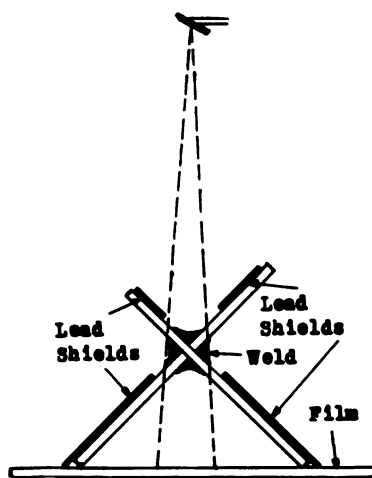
Manner of Radiographing a Cross Weld. Note Various Lead Shieldings.
